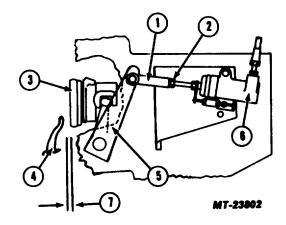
Release Bearing Clearance Adjustment, Typical (Push Type Clutch)
